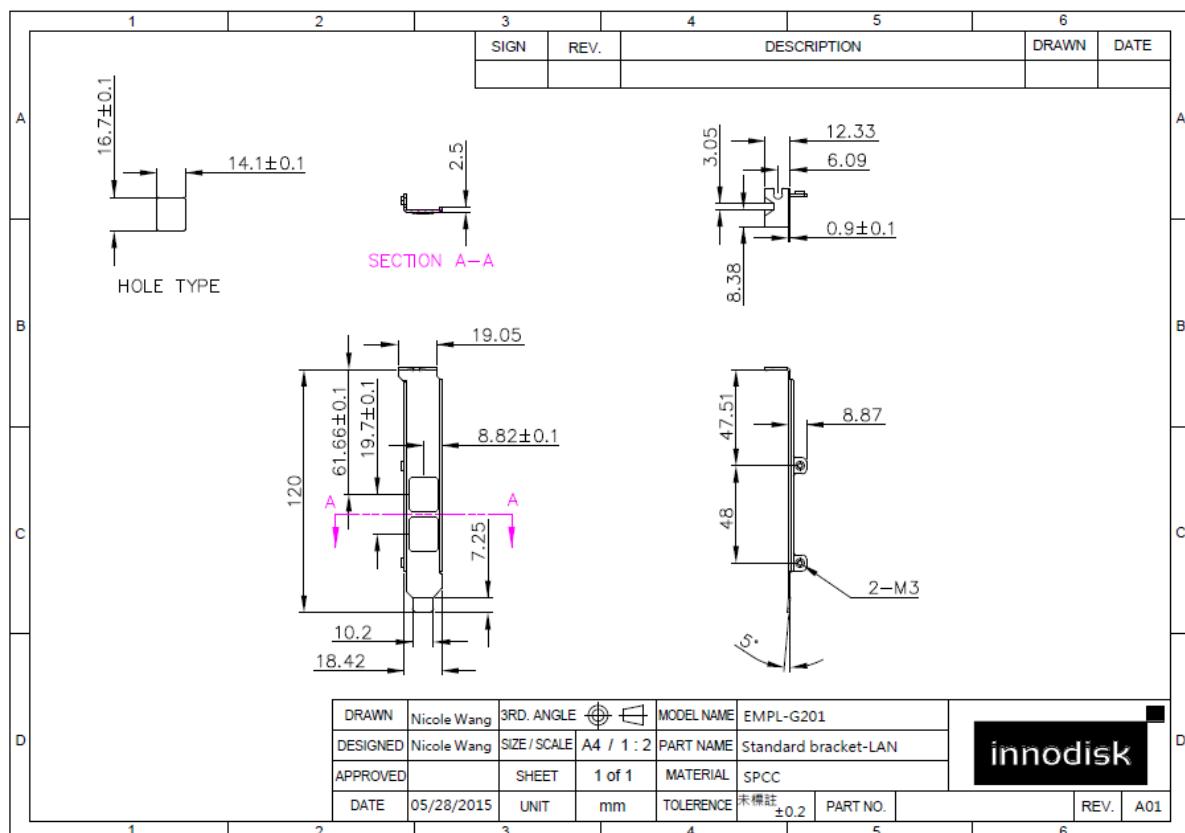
EMPL-G201 mPCIe Board Drawing
